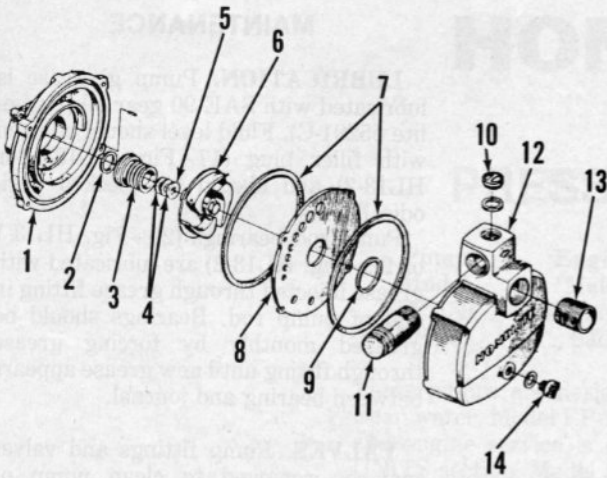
Exploded view of Model 120S3-1 and 120S3-1A centrifugal pumps. Refer to Fig. HL12-1 for parts identification.
